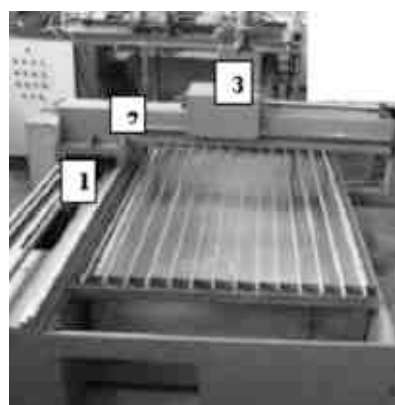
Waterjet cutting and mechanical machining table with CNC command – general view
